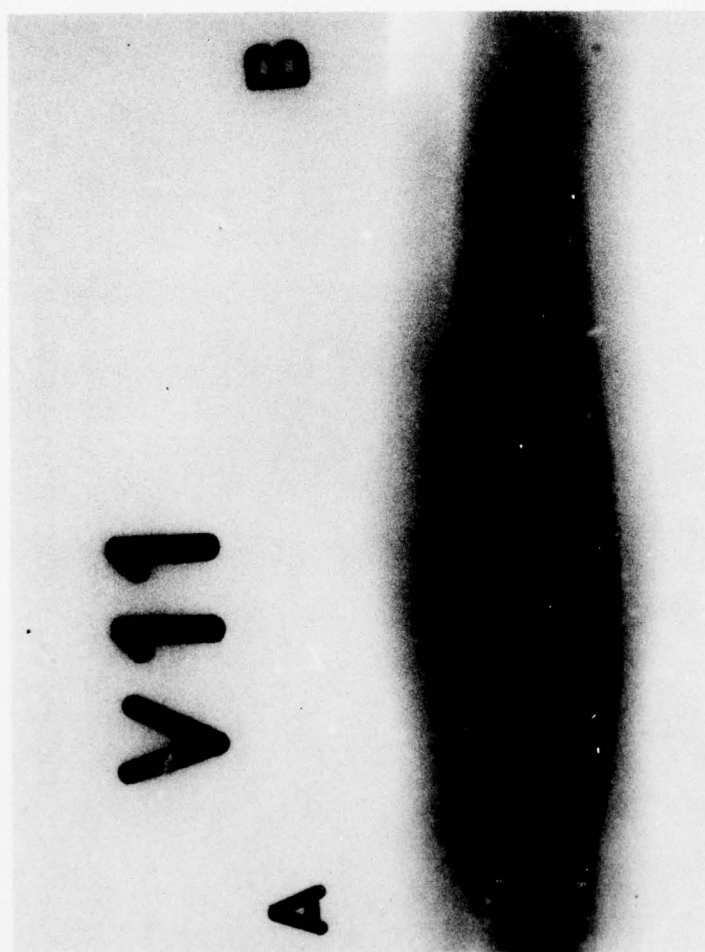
RADIOGRAPH OF WELD V-11
